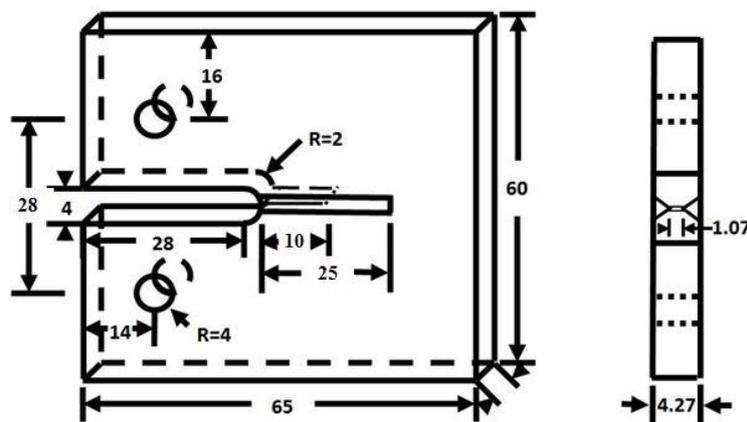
Dimensions of GCT specimen (all dimensions are in mm)
